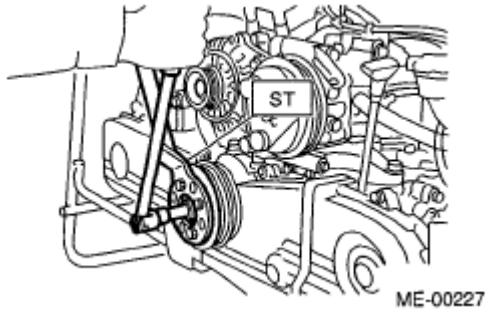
Removing Crank Pulley Bolt Using Crank Pulley Wrench ST499977100
